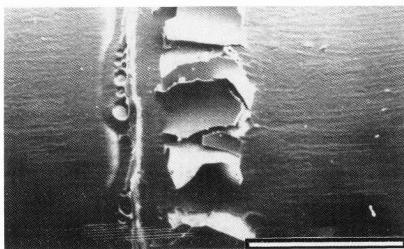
Fractured Enamel at a typical weld area. Bar=1,000 μ m.
